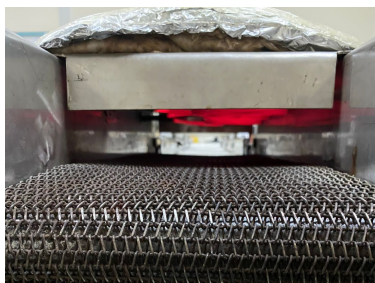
Heat-Tolerant Metal Conveyor in Oven Segment
